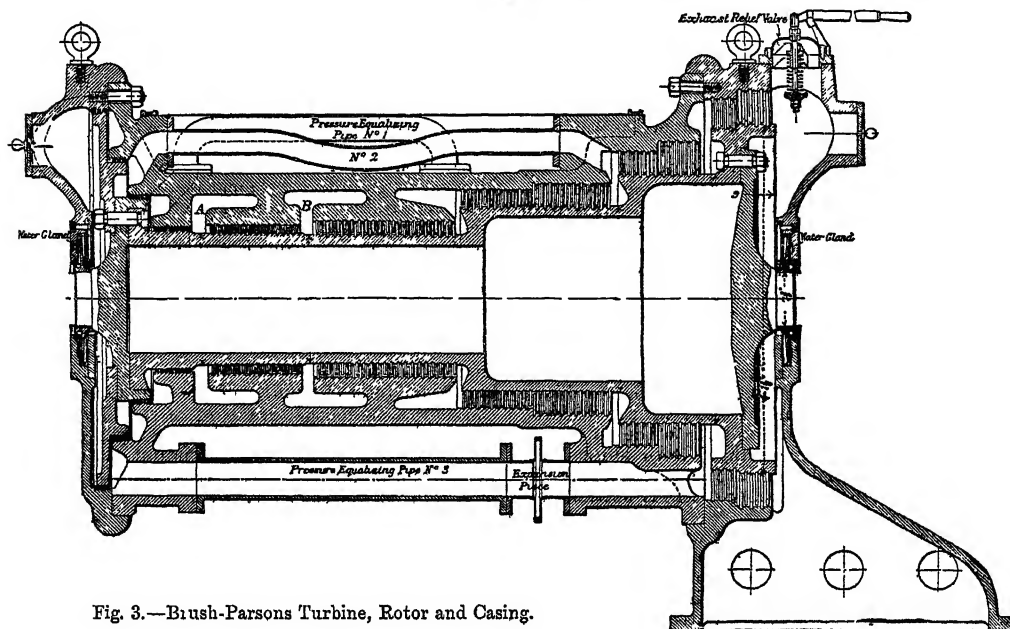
Brush-Parsons Turbine, Rotor and Casing.
